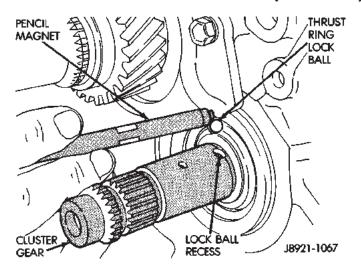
Install Fifth Gear Thrust Ring Lock Ball
